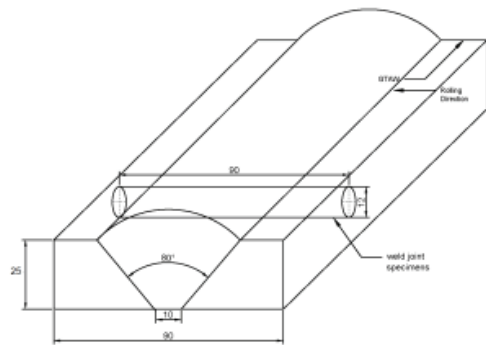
Illustration of specimen cutting from the GTAWed pad
